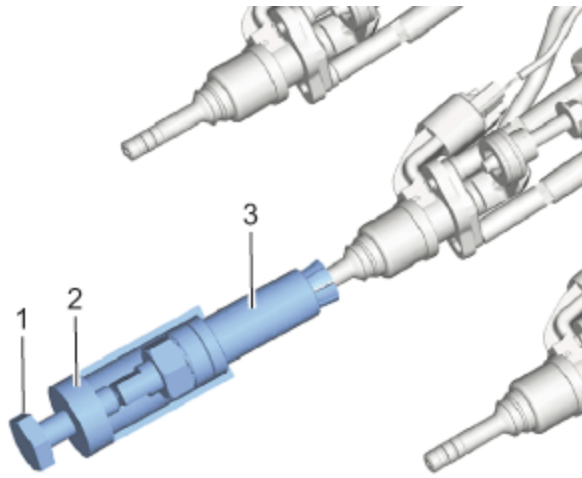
Take Off Chassis And Pre-Sizing Tool
